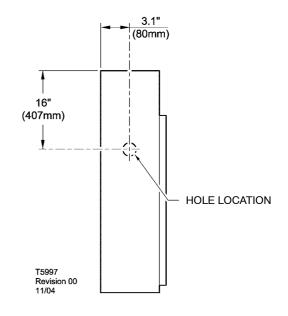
STARTER ENCLOSURE (WITH HORN MOUNTING HOLE LOCATION)
